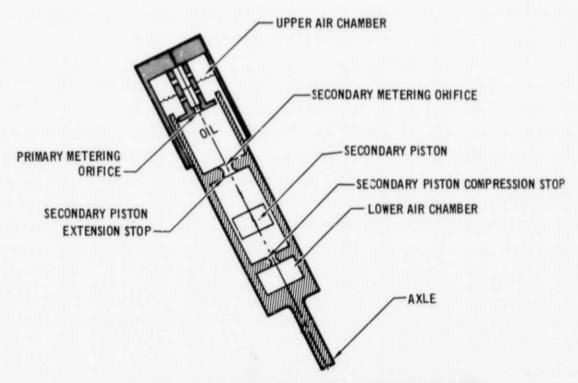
LANDING GEAR STRUT CONFIGURATION
